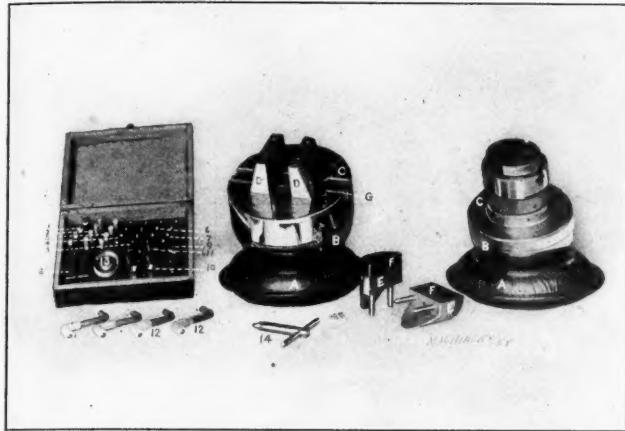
Regular and Keyless Engraving Blocks and Attachments
